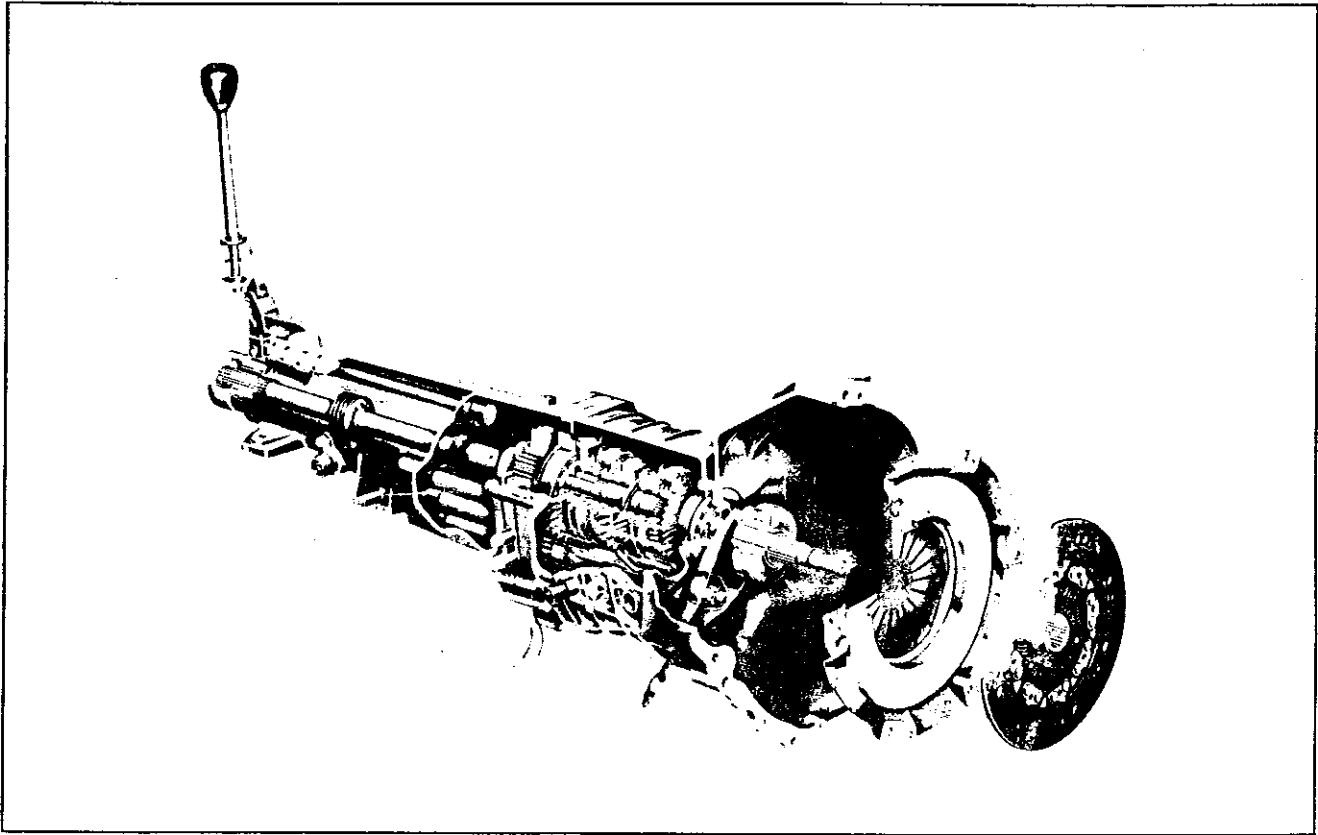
Clairvoyant view of type F4W71A transmission
